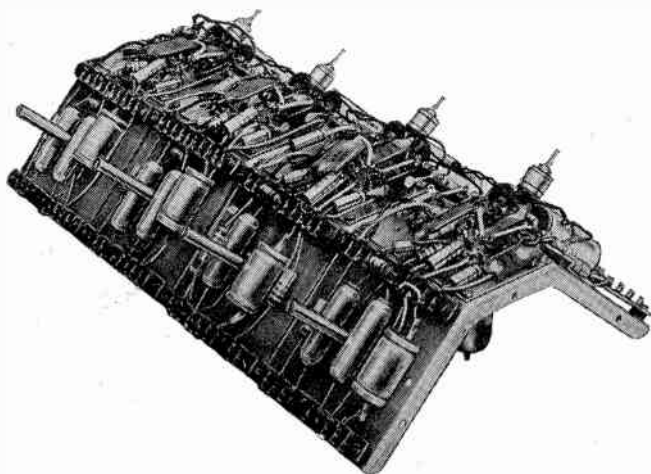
A typical prototype chassis using four 'Labix' units. Components and controls are readily accessible
